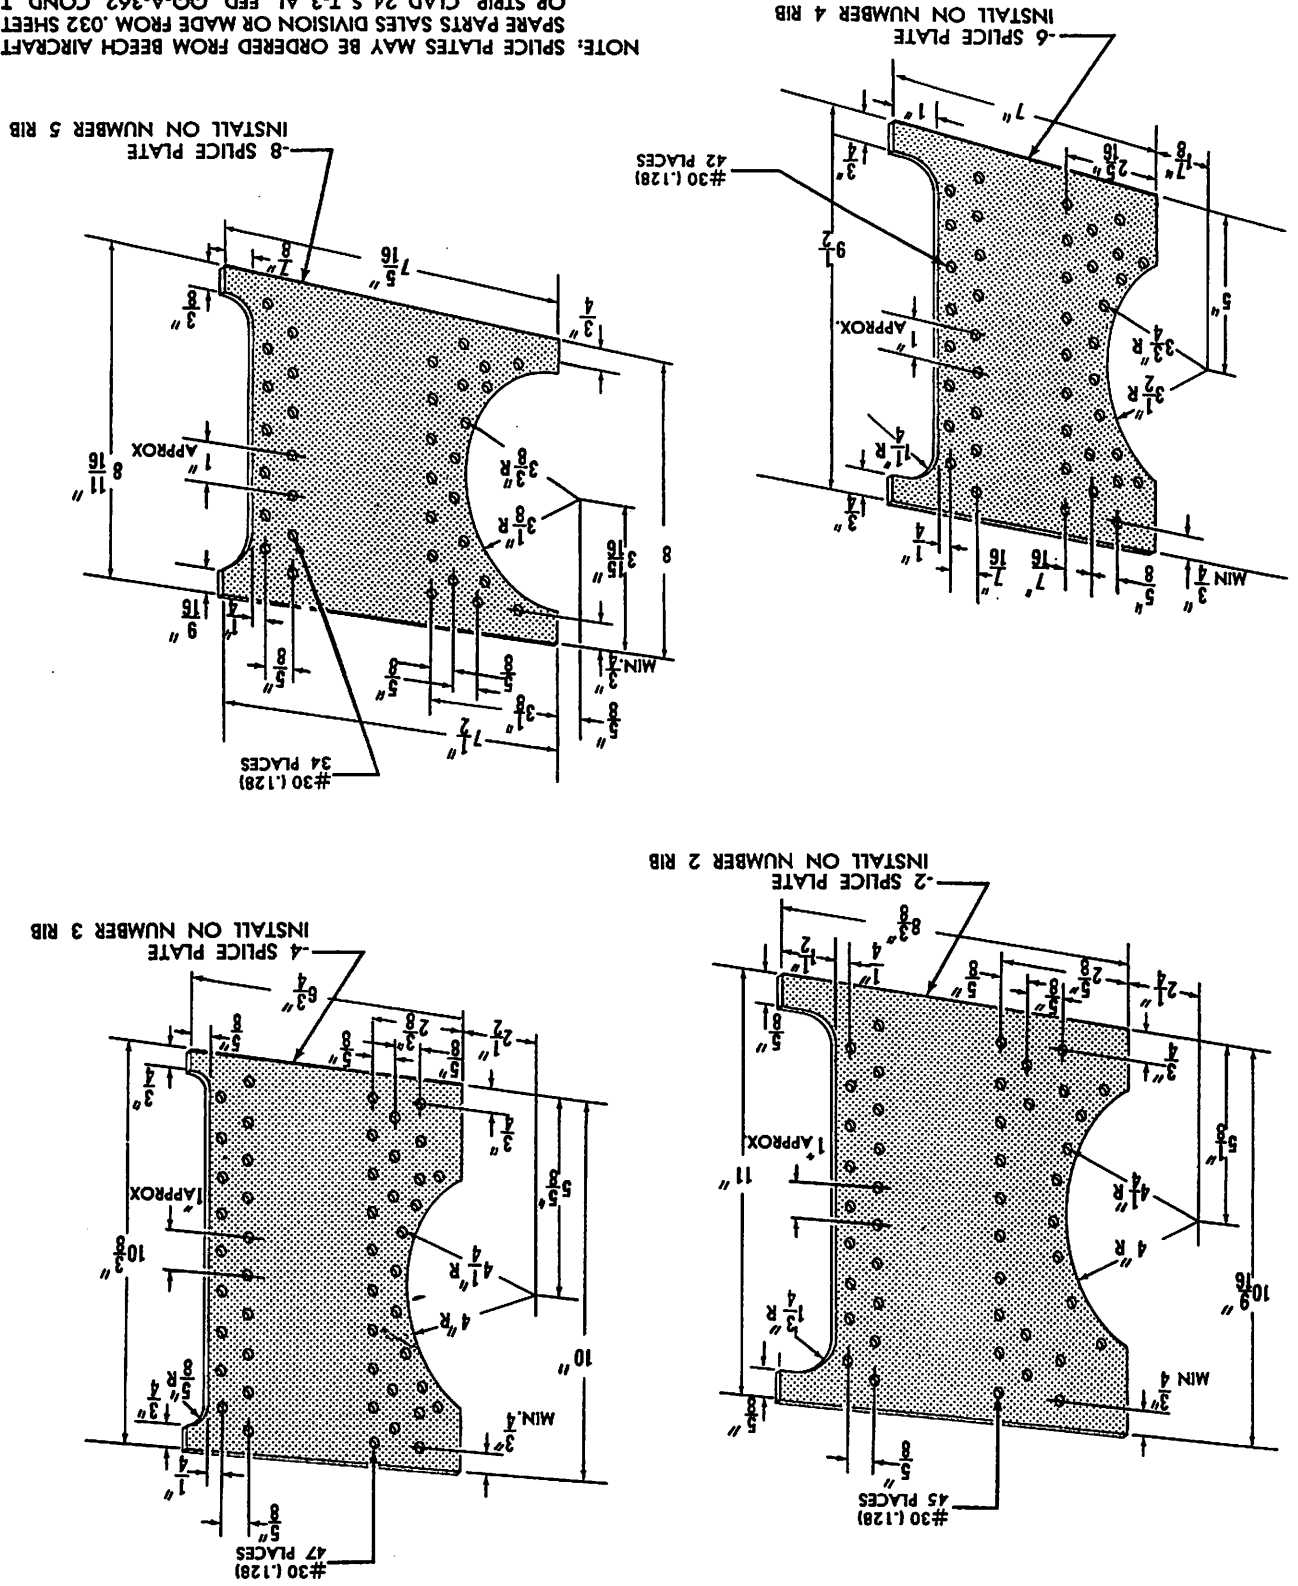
A. Outer Wing Panel Front Spar Replacement (Sheet 5 of 6 Sheets)
